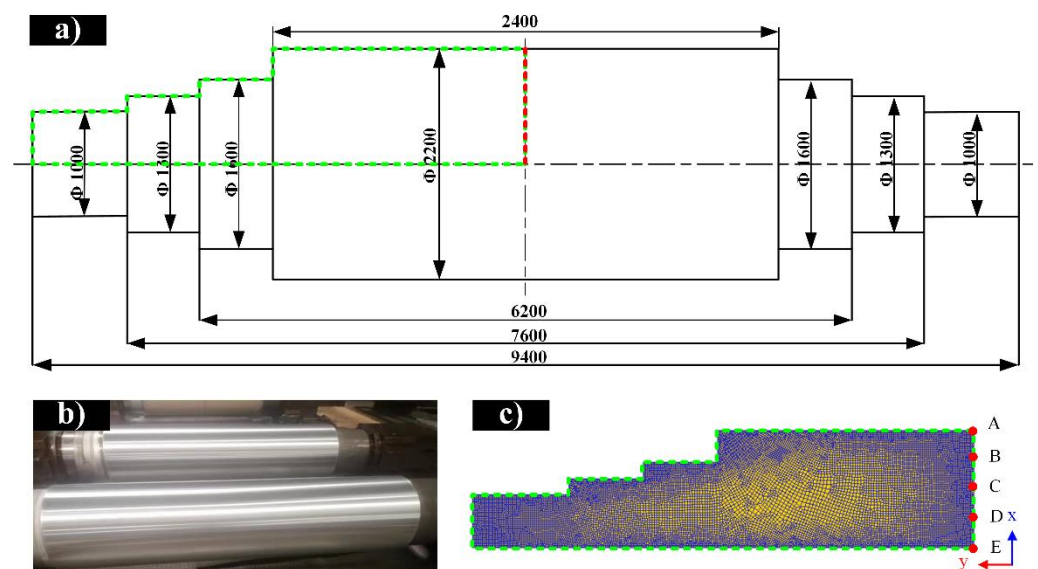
Geometric dimension and finite element model of heavy forging. (a) Geometric features and dimensions of forgings; (b) physical drawing of heavy forgings; (c) grid division diagram of forging DEFORM[®] model.
